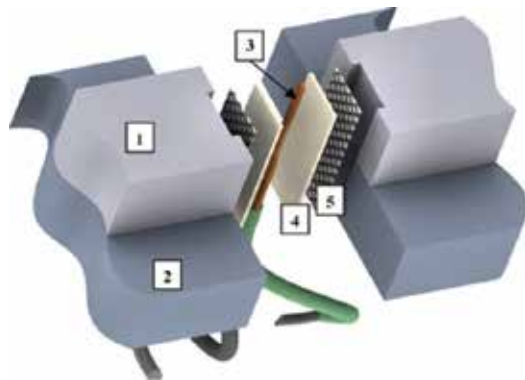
Schematic of single pole configuration thermocouple: where 1-workpiece, 2-workpiece base, 3-thermocouple, 4-mica, 5-varnish layer, 6-grinding wheel [49].
